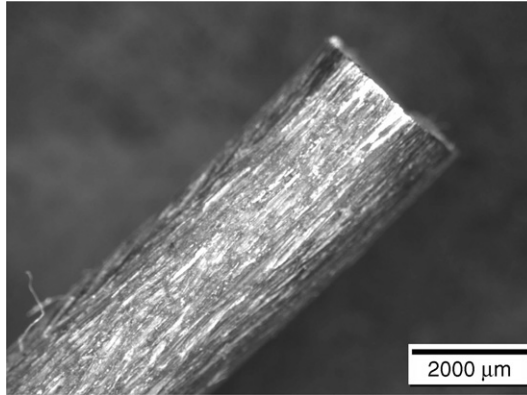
Typical example of a wire break at a weld. The longitudinal surface striations were generated in dressing the weld.
